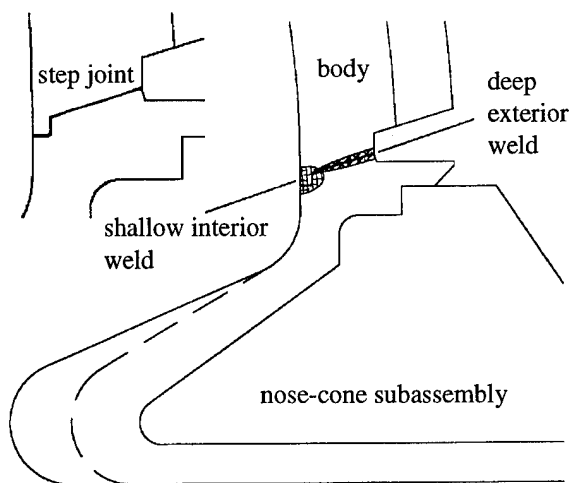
Electron-beam weld joint between cavity body and nose-cone subassembly. Main weld is done from the outside and crack is sealed by shallow interior weld. The step in the joint makes for positive alignment.
